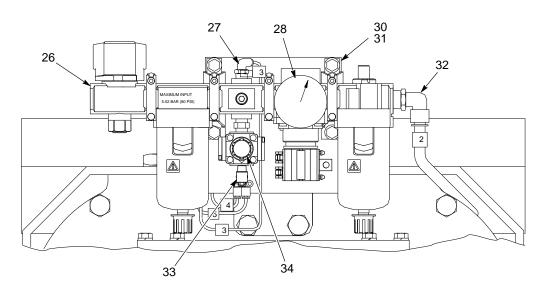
Miscellaneous Pump Parts (FRL module shown) (4 of 4)
